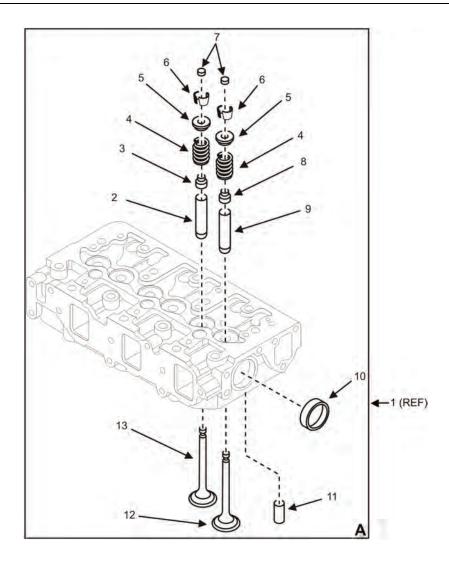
Cylinder Head Assembly (Sheet 2 of 2).
